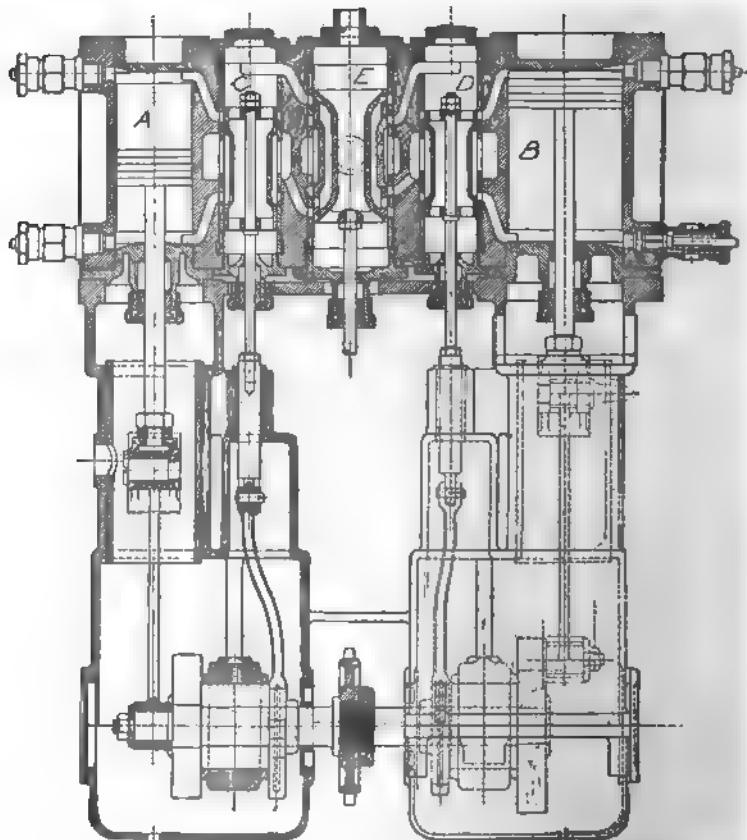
Section of the Stearns Compound Steam Carriage Engine. A is the high-pressure cylinder; B, the low-pressure cylinder; C and D, the steam valves operated by single eccentrics. E, the central control valve and chamber.
